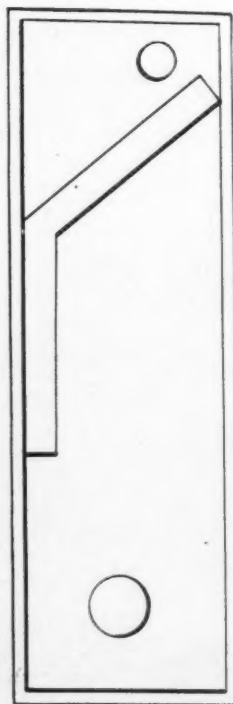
Lock made of $\frac{1}{2} \times 3\frac{1}{2}$ - inch flat iron, with $\frac{3}{4} \times 2\frac{1}{2}$ - inch flat iron bent and welded on.
